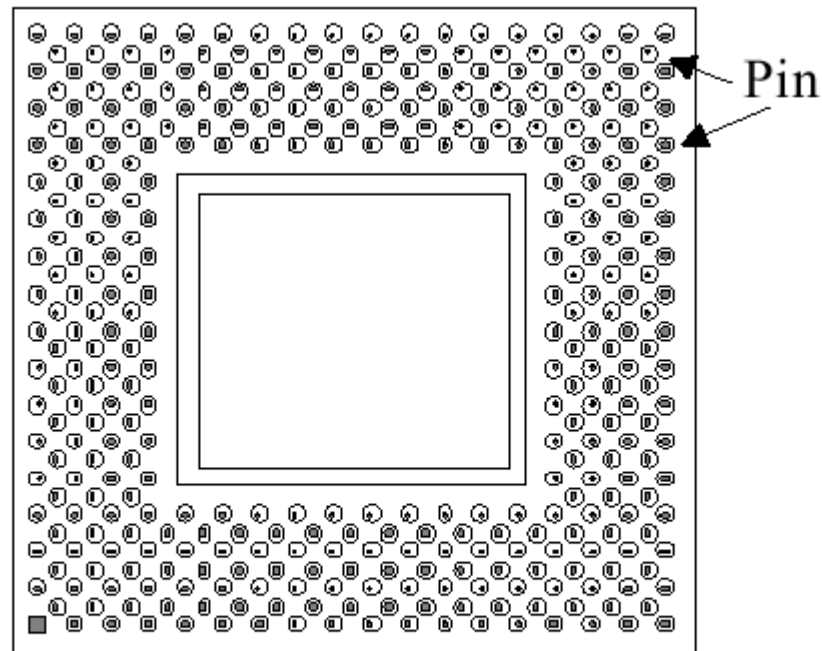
Bottom view of a pin grid array (PGA) package.
